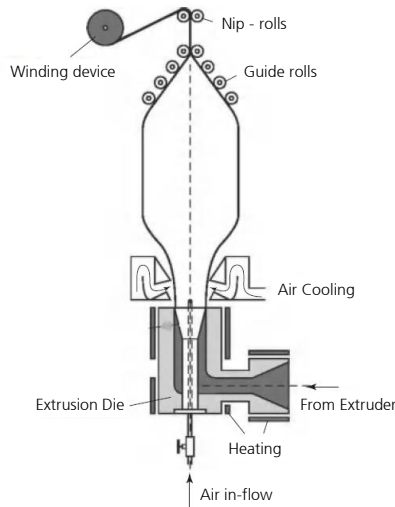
Post-extruder section of a typical blown film extrusion line. Modified from [178]
